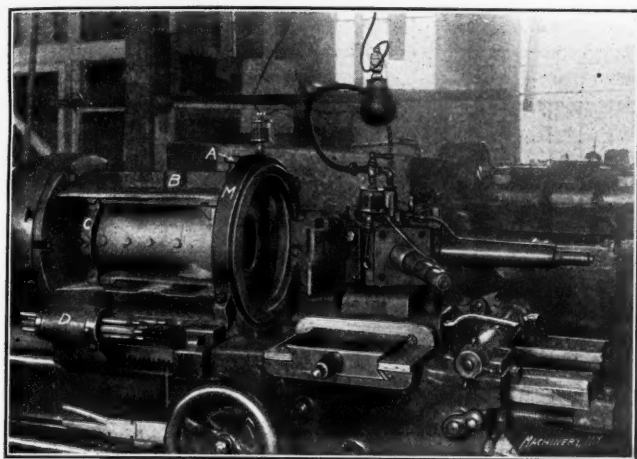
Reversible Revolving Fixture for Boring Crank and Transmission Cases.
